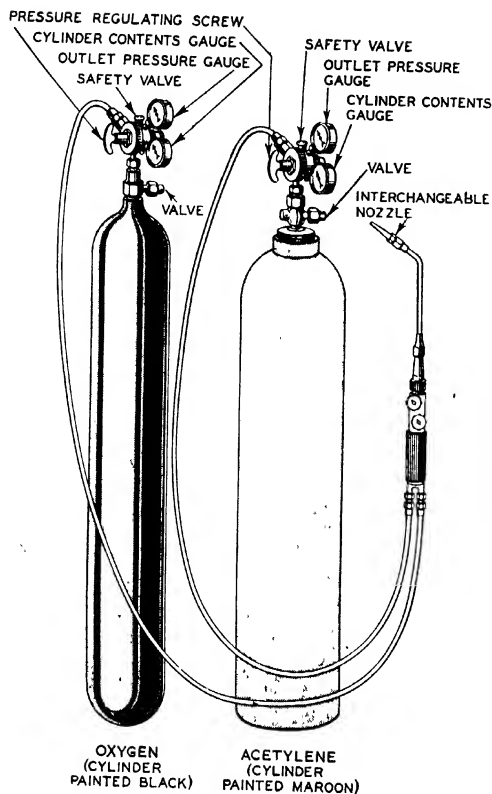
ASSEMBLY OF HIGH-PRESSURE EQUIPMENT
